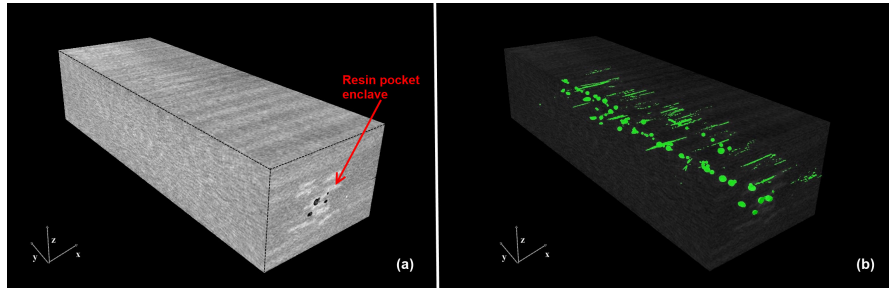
Micro-CT: (a) 3D reconstruction; (b) Defects distribution
